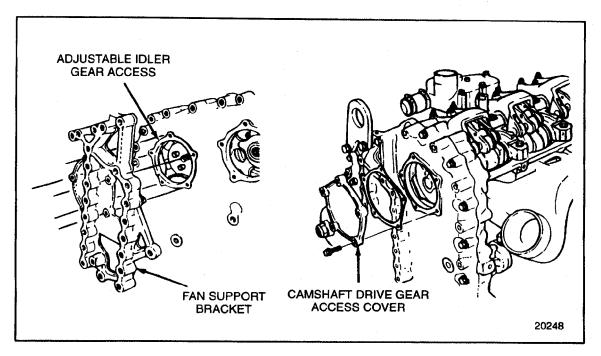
Camshaft Drive Gear Access Cover and Adjustable Idler Gear Access
